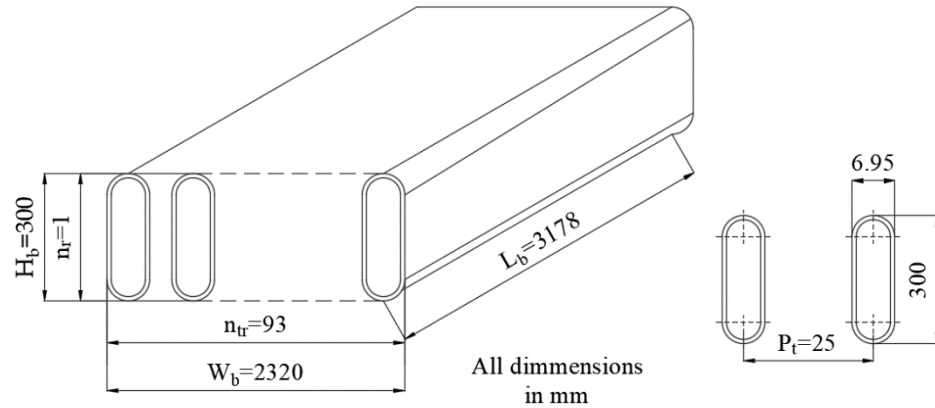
38: The tube layout and dimensions of the final CDTB's configuration
